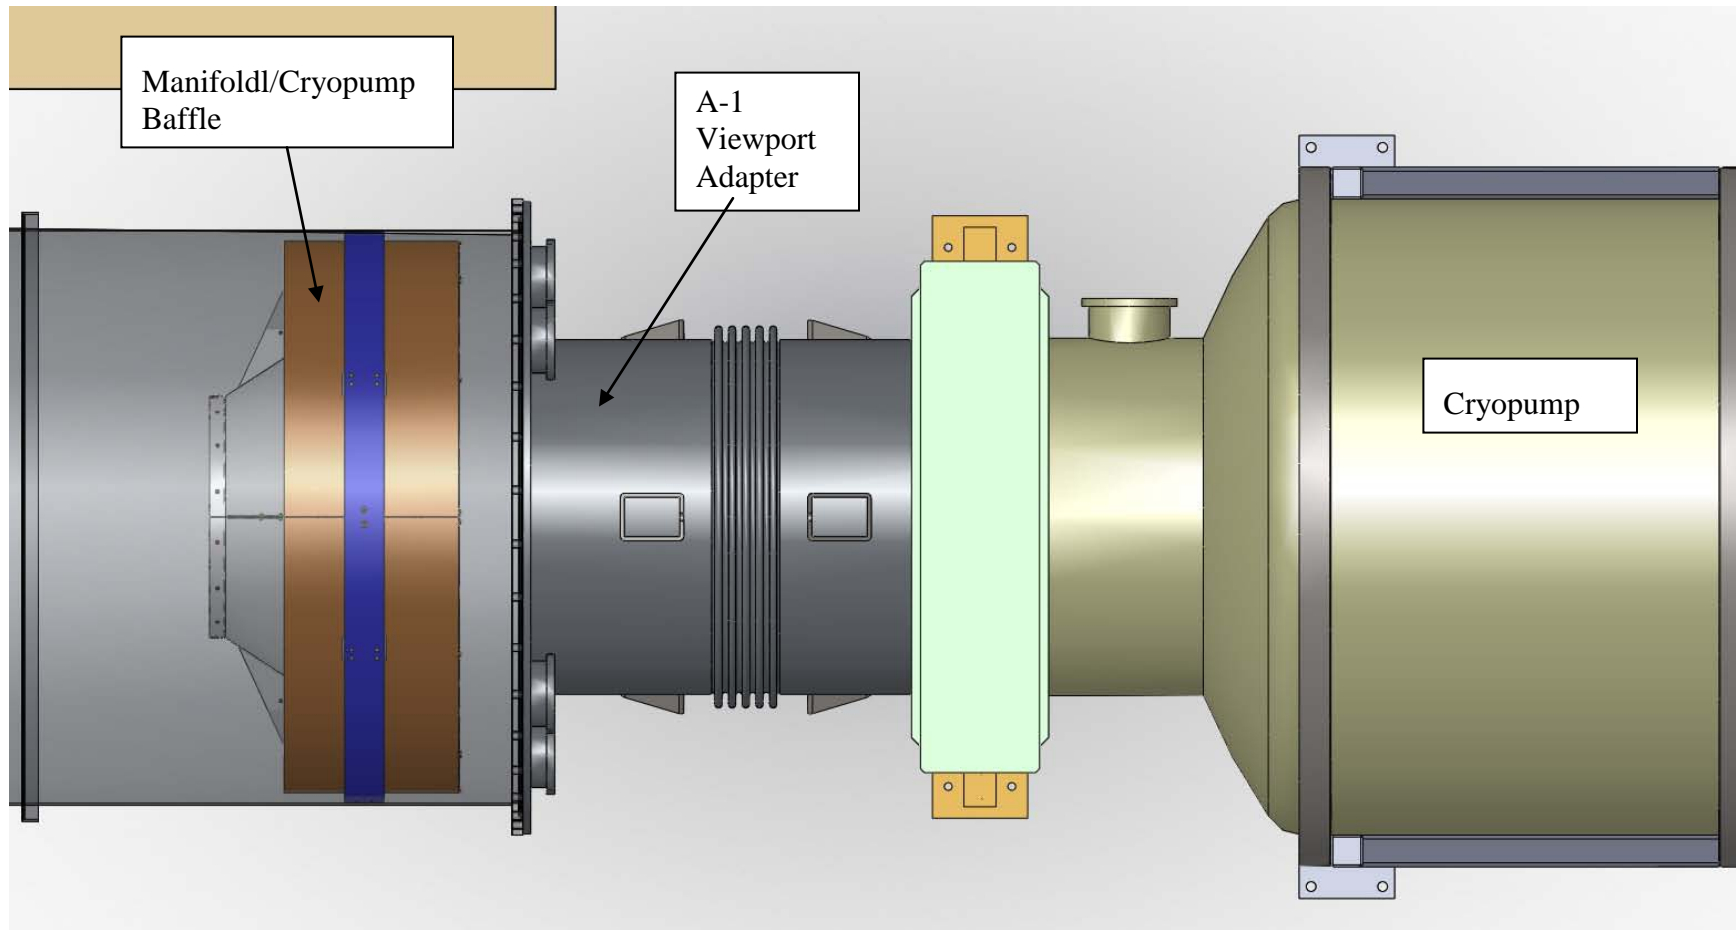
Manifold/Cryopump Baffle Positioned in the Manifold Tube near A-1 Viewport Adapter
